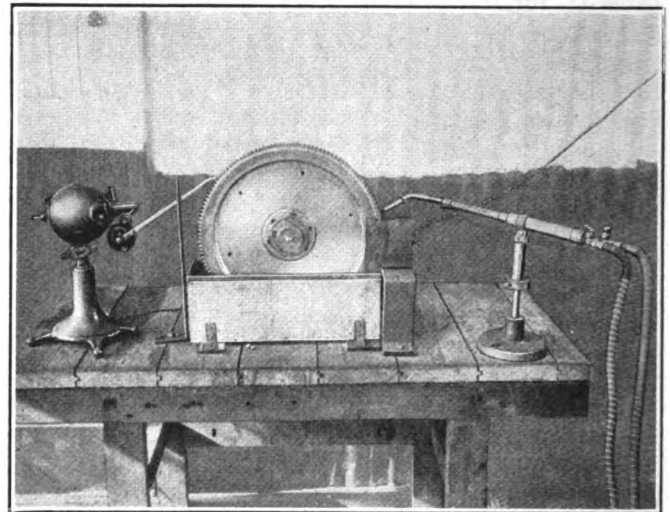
THE DEVICE WITH A GEAR IN PLACE
